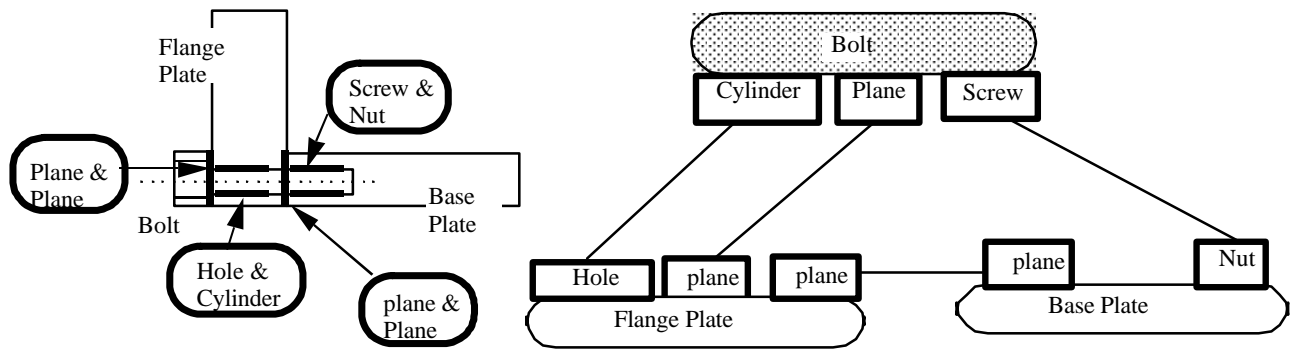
Assembly model example 1: Two plates are fixed by a bolt
